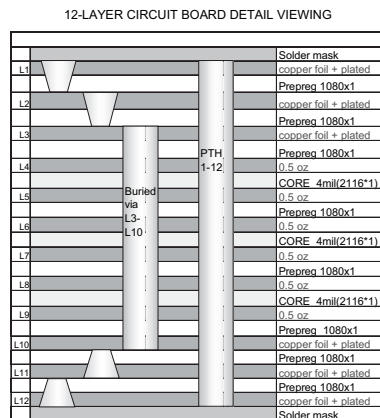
12-Layer Circuit Board Detail Viewing
